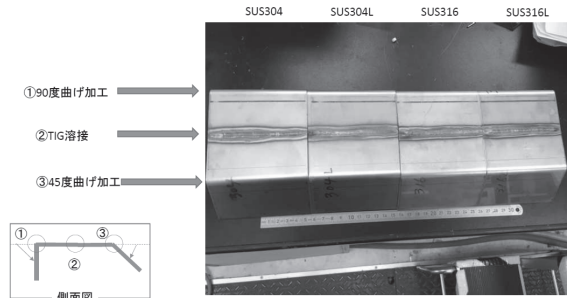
Illustration and photograph of the bent and welded samples of stainless steel.
